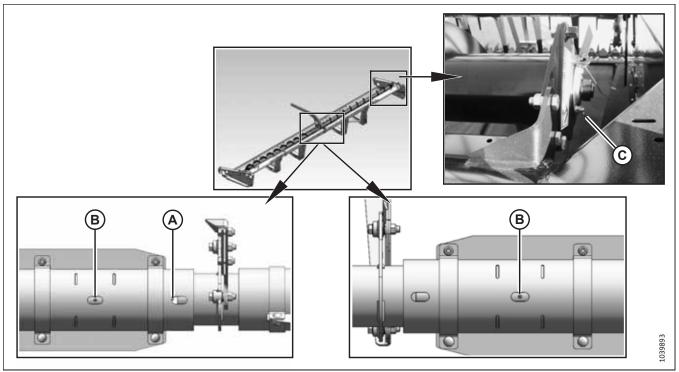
Every 50 Hours – Upper Cross Auger, Old Assembly
